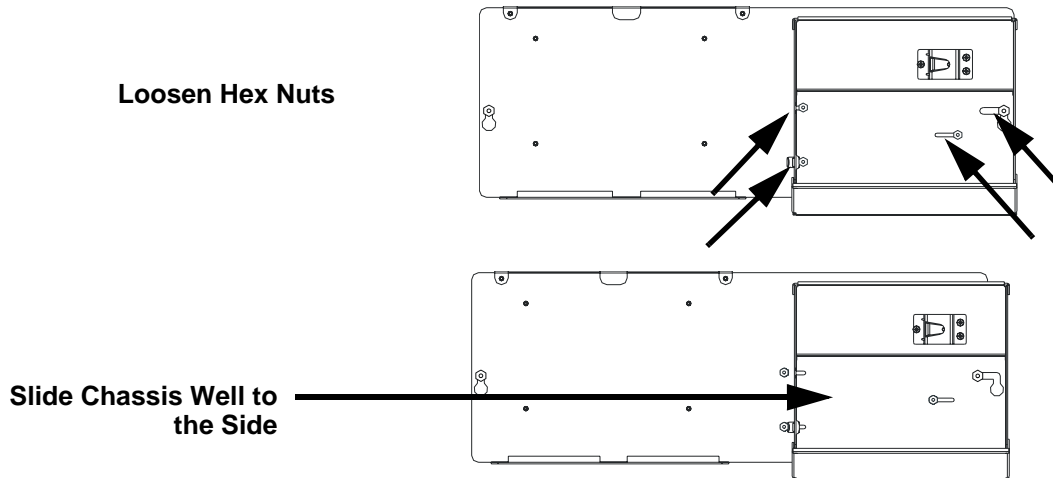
Moving the CMIC-1 Chassis Aside for Wiring Access
